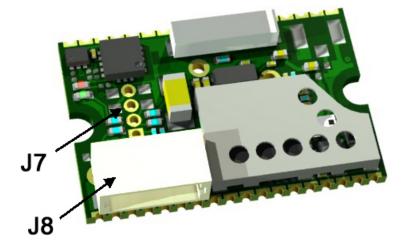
The JST connector J8 mounted on the component side of the PCB.
